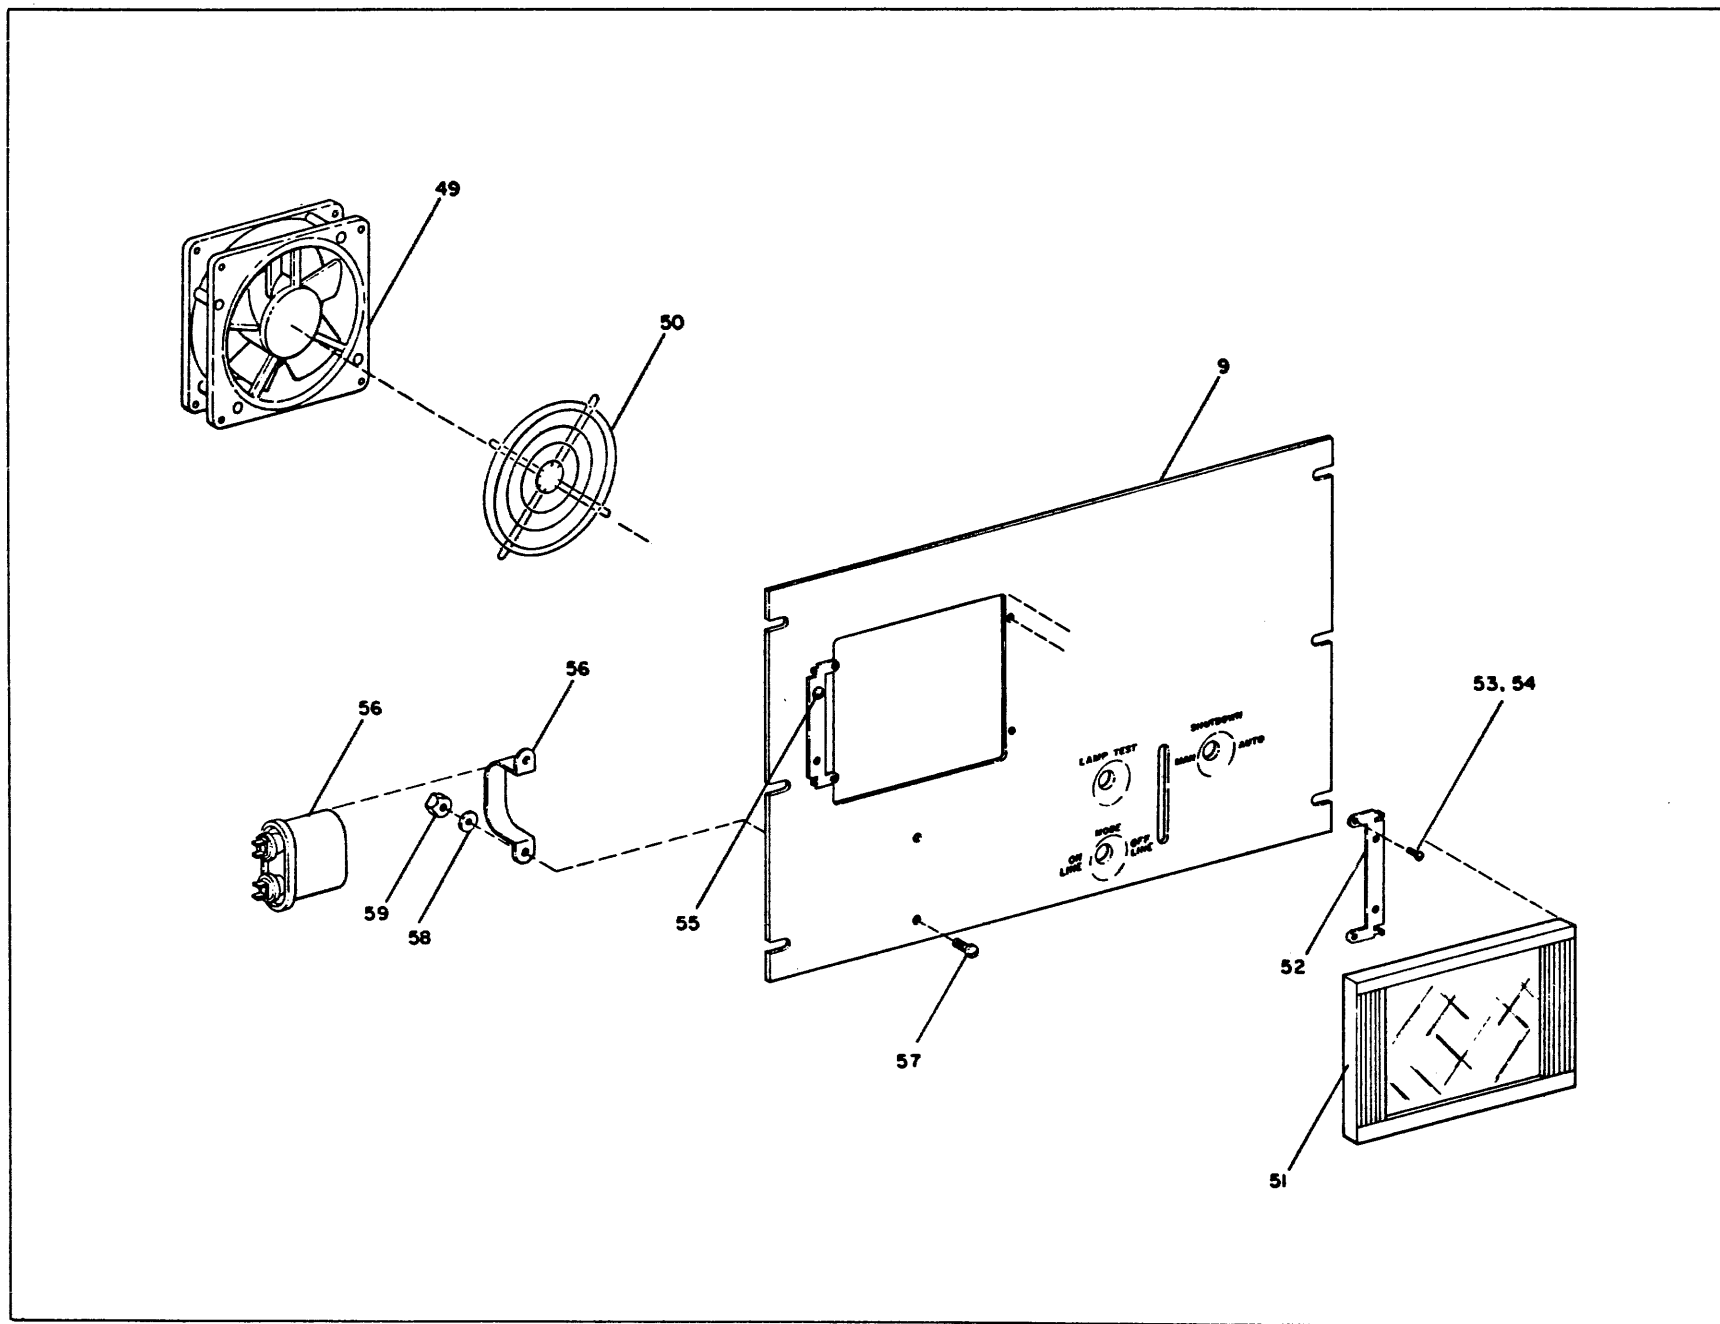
TRIM GROUP ASSEMBLY (sheet 2 of 6)
